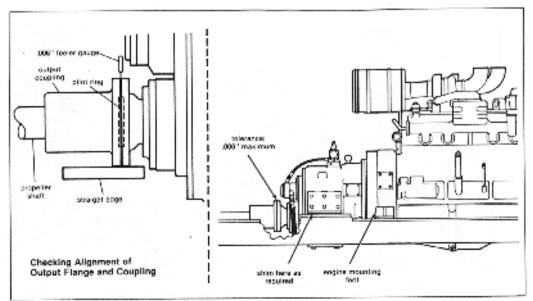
Alignment of Output Flange and Propeller Shaft Coupling
